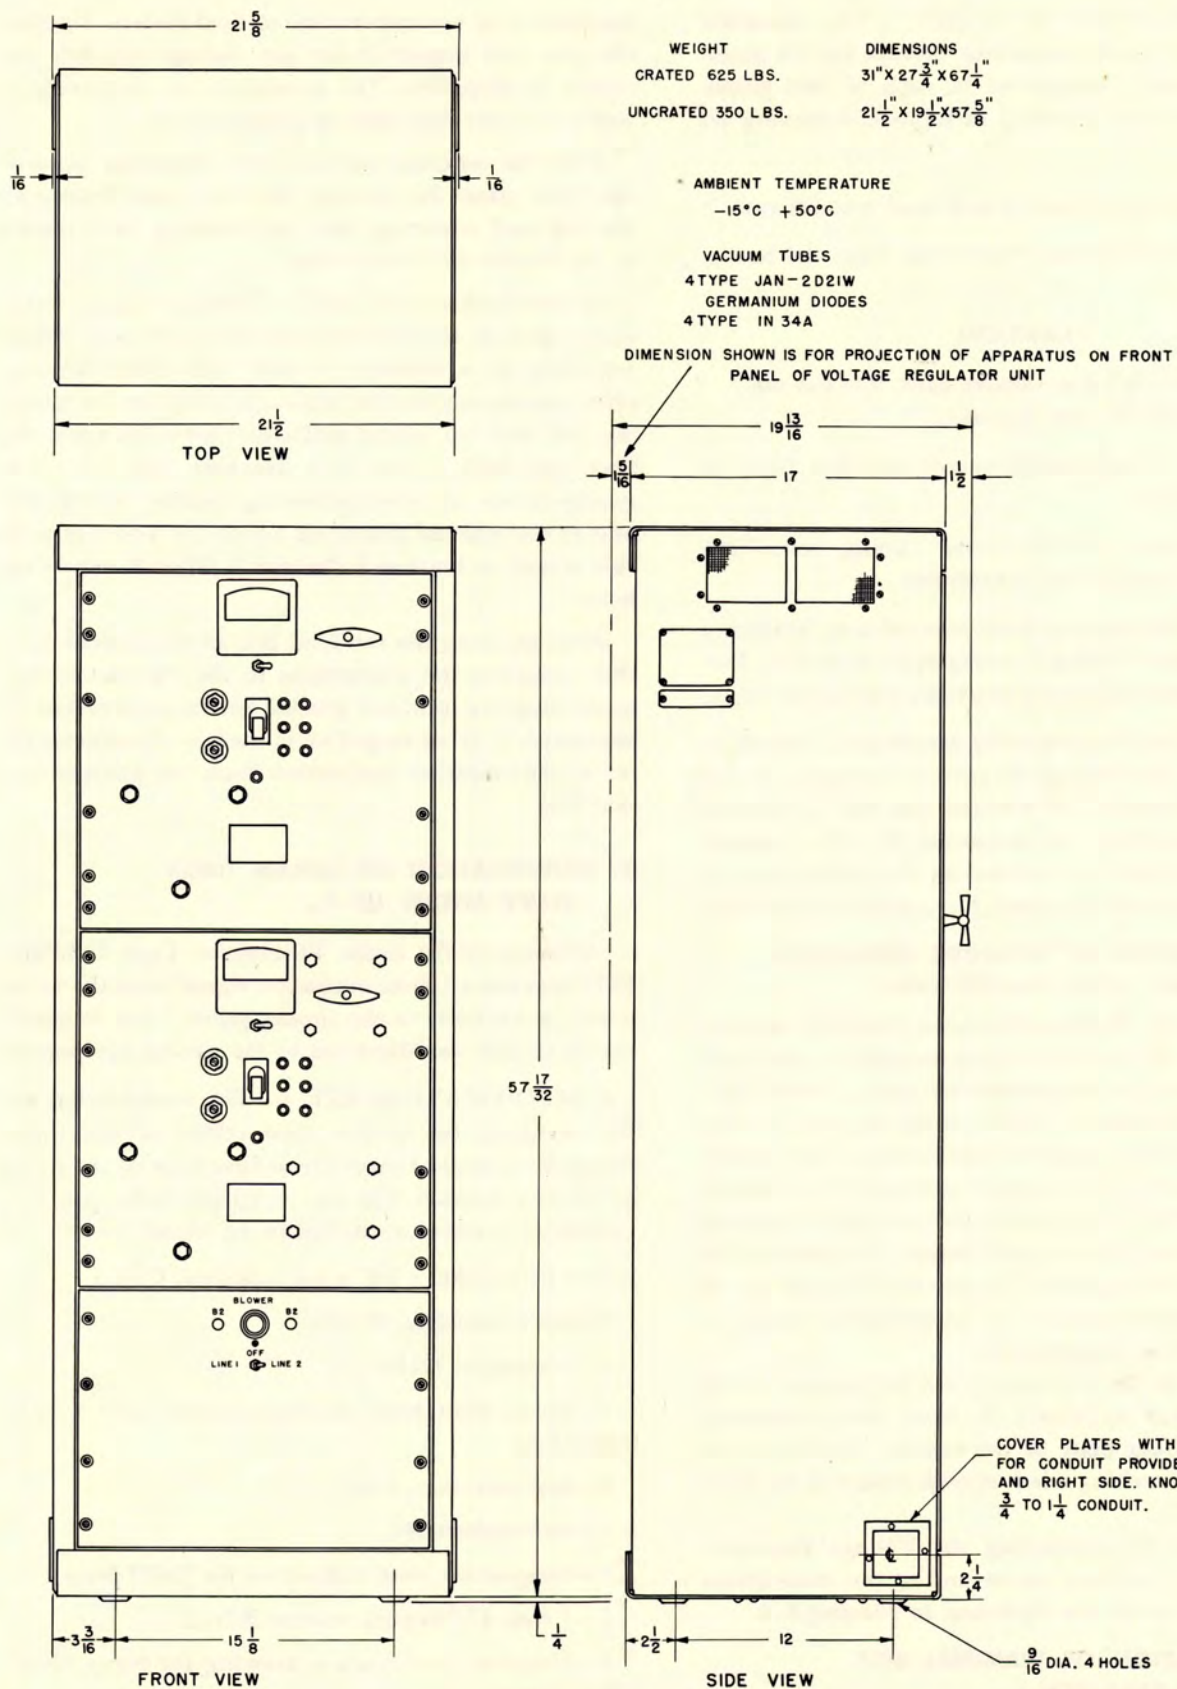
Outline, Voltage Regulator Assembly Type CN-239/FPN
